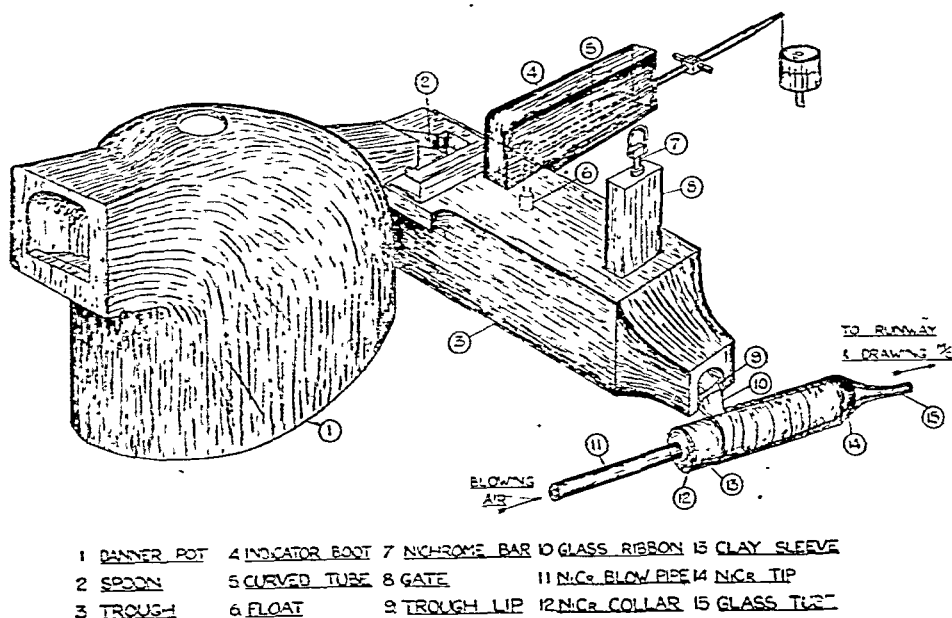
DANNER TUBE-DRAWING MACHINE.
